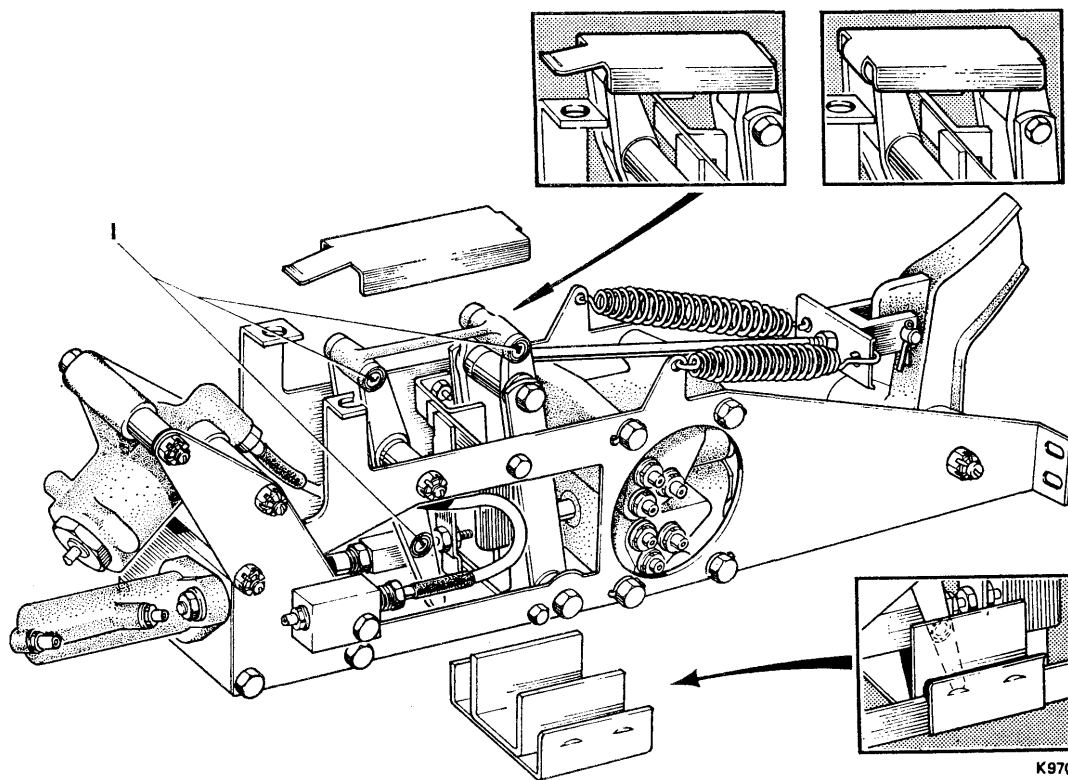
METHOD OF FITTING LINKAGE RETAINING CLIPS (EARLY CARS)
